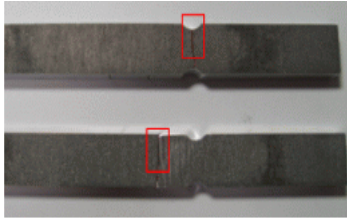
Location of fretting and plain fatigue cracks
